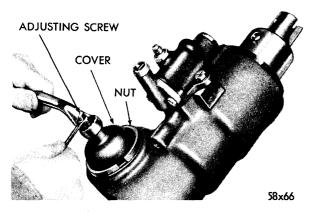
Adjusting Gear Shaft Adjusting Screw
